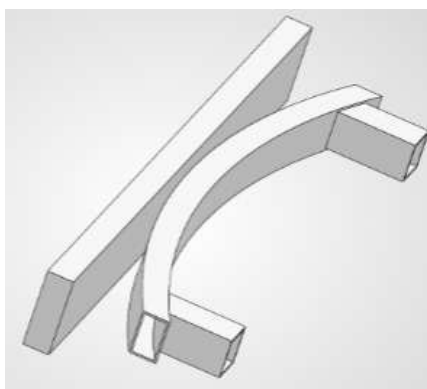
Model Setup of Bumper Beam–Crash Box and Wall Assembly
